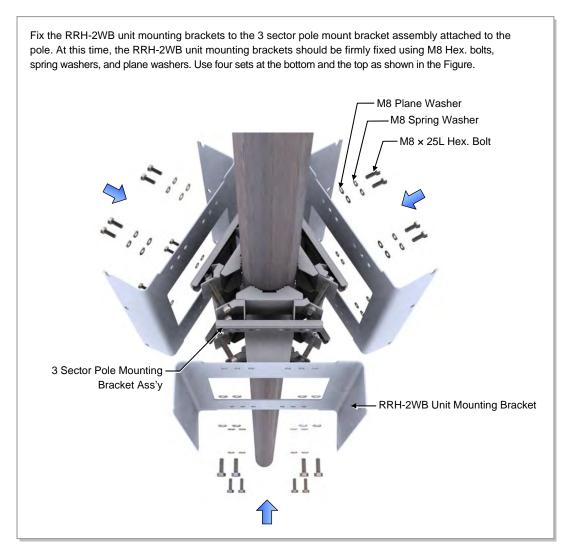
Fixing 3 Sector Pole Type RRH-2WB (4)
